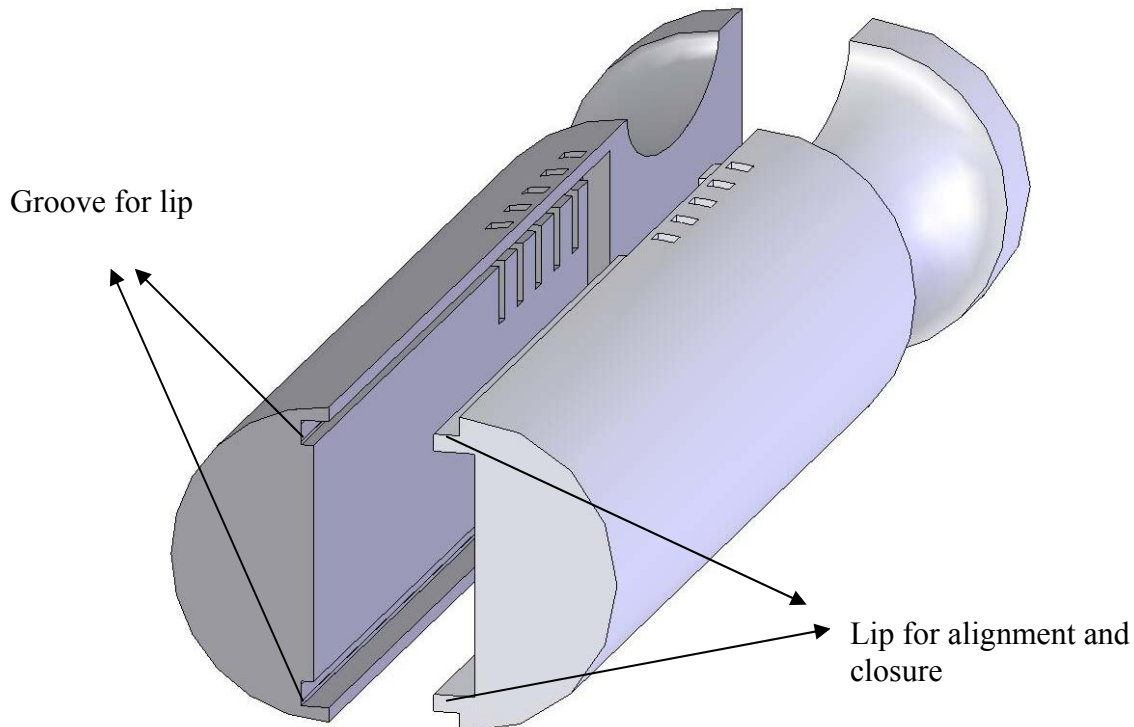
Picture from bottom view showing the lip of 3D CAD model
